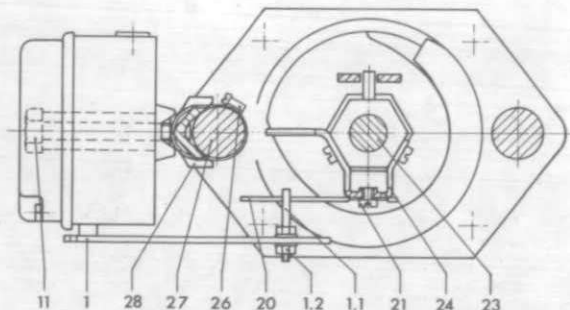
Attachment in the case of rod type valve (e.g. type 201)
